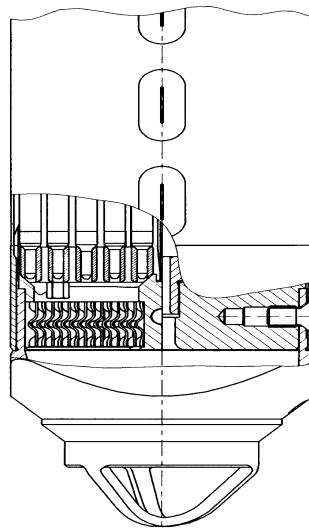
Fuel Assembly Inlet Part with TripleWave Debris Filter.
